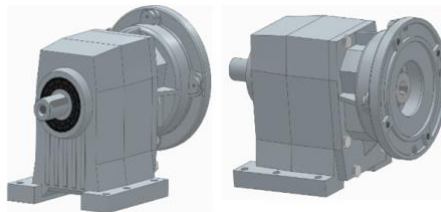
Gearbox Assembly modelling on Solid Edge 2024
